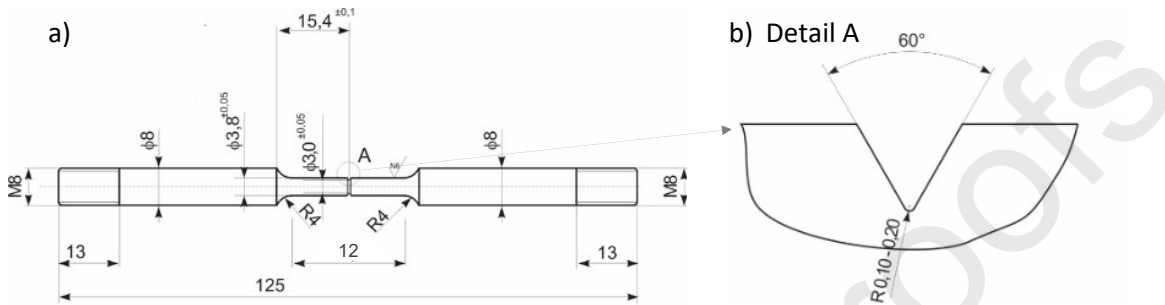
Dimensions of the SSRT tensile specimen (a) with a V-notch (b)
